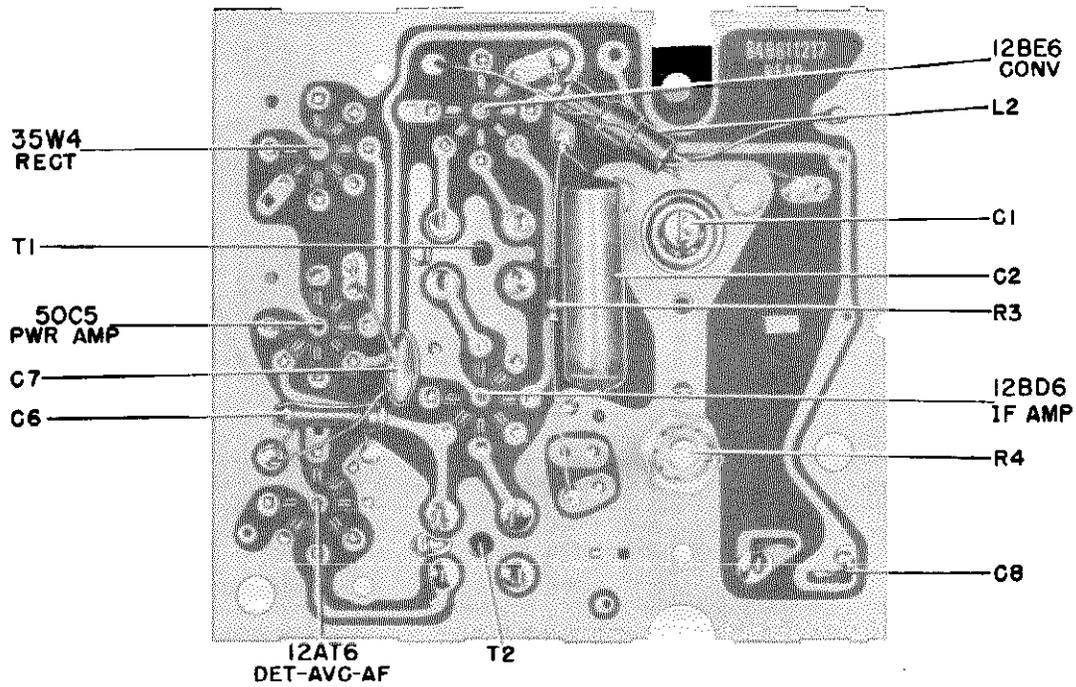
REAR VIEW OF CHASSIS (EARLY MODEL)
